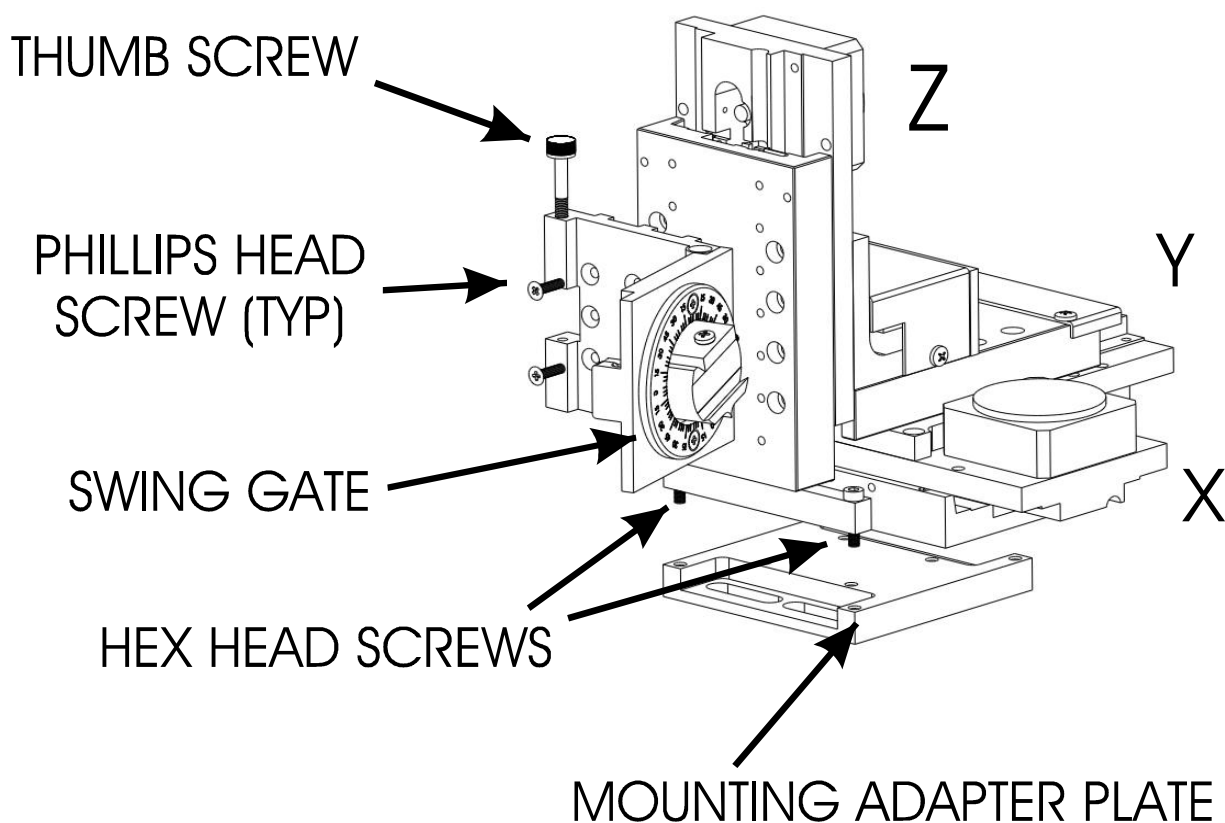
Angled side view of MP-285/M showing swing gate and mounting adapter plate.
